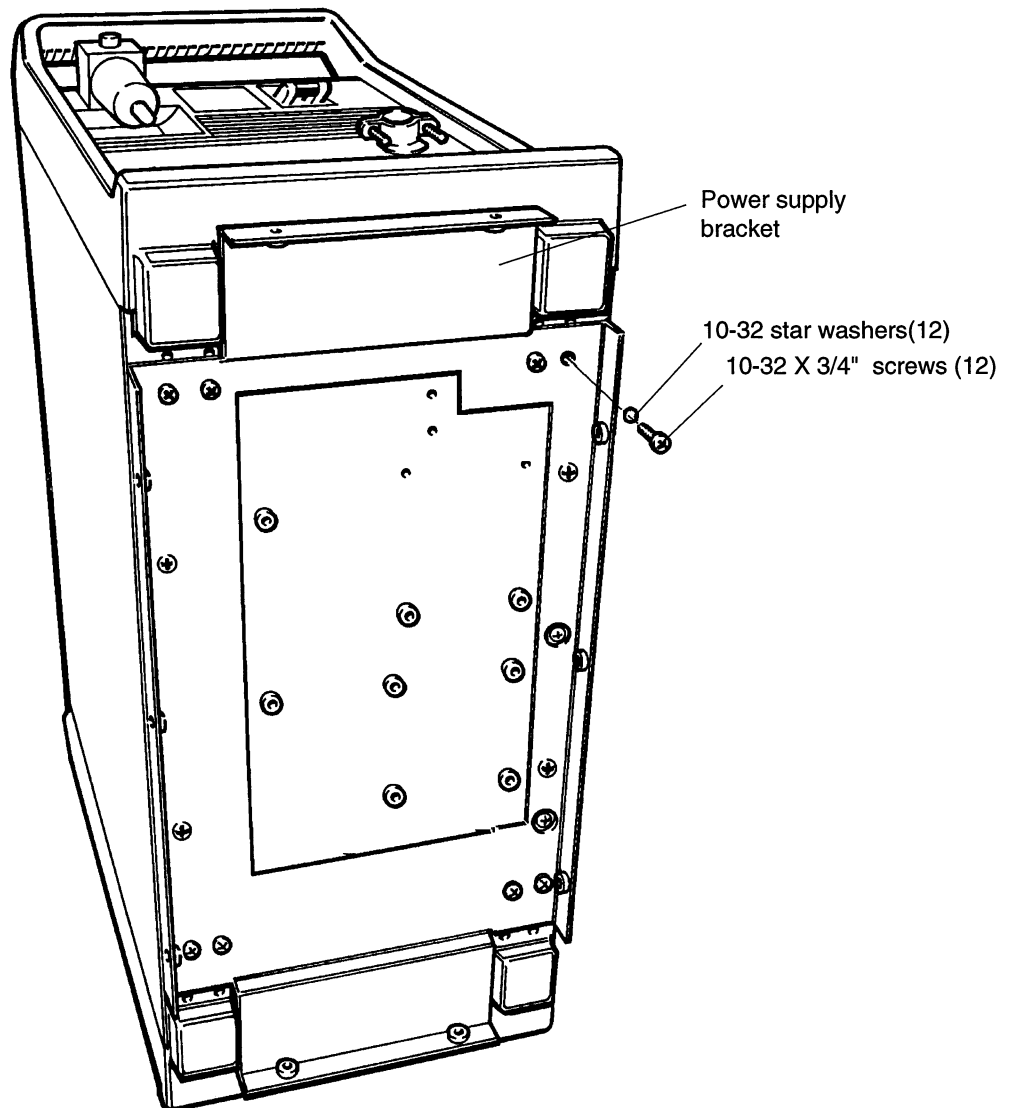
Attaching 600V Power Supply Bracket to Powermax1100 Chassis
